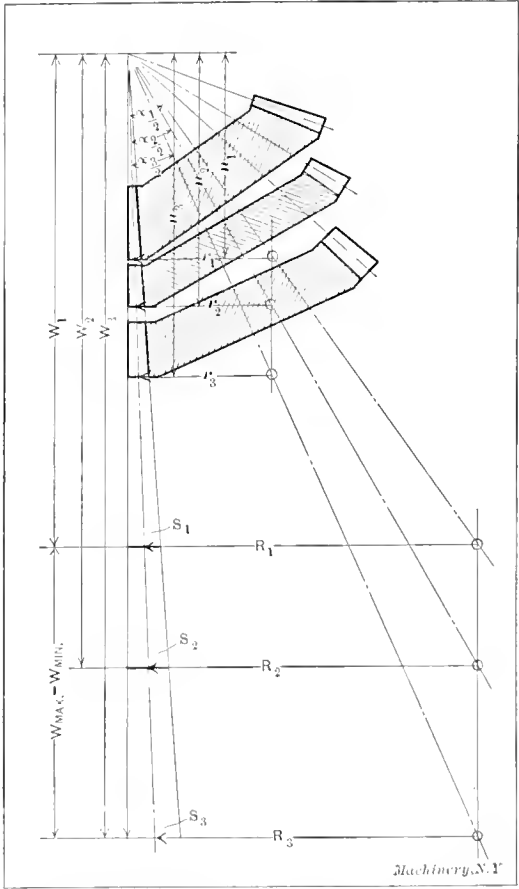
Diagram showing how Correct Bevel Gear Teeth can be cut with a Limited Number of Adjustable Formers
